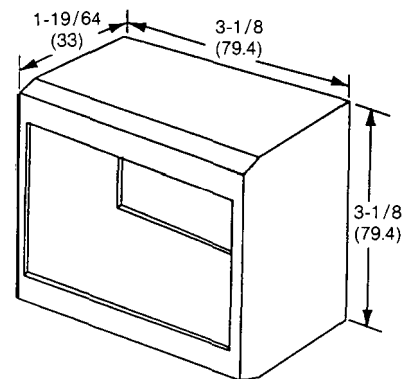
TS-81011 Series Overall Dimensions European 1/4 DIN Standard Mounting.
